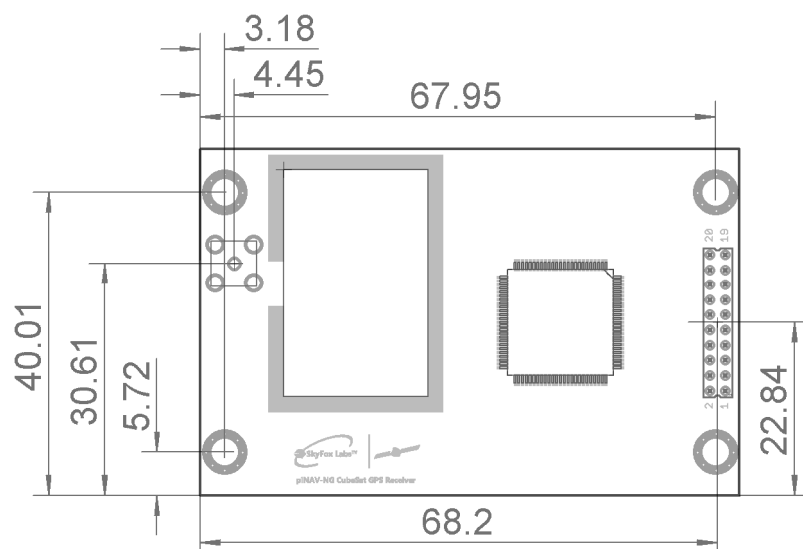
The piNAV-NG Dimensions, Connector pinout and recommended footprint. NOTE: The piNAV-NG is displayed from the TOP side. Dimensions are shown in millimeters. Detailed dimensions drawing available on request.
